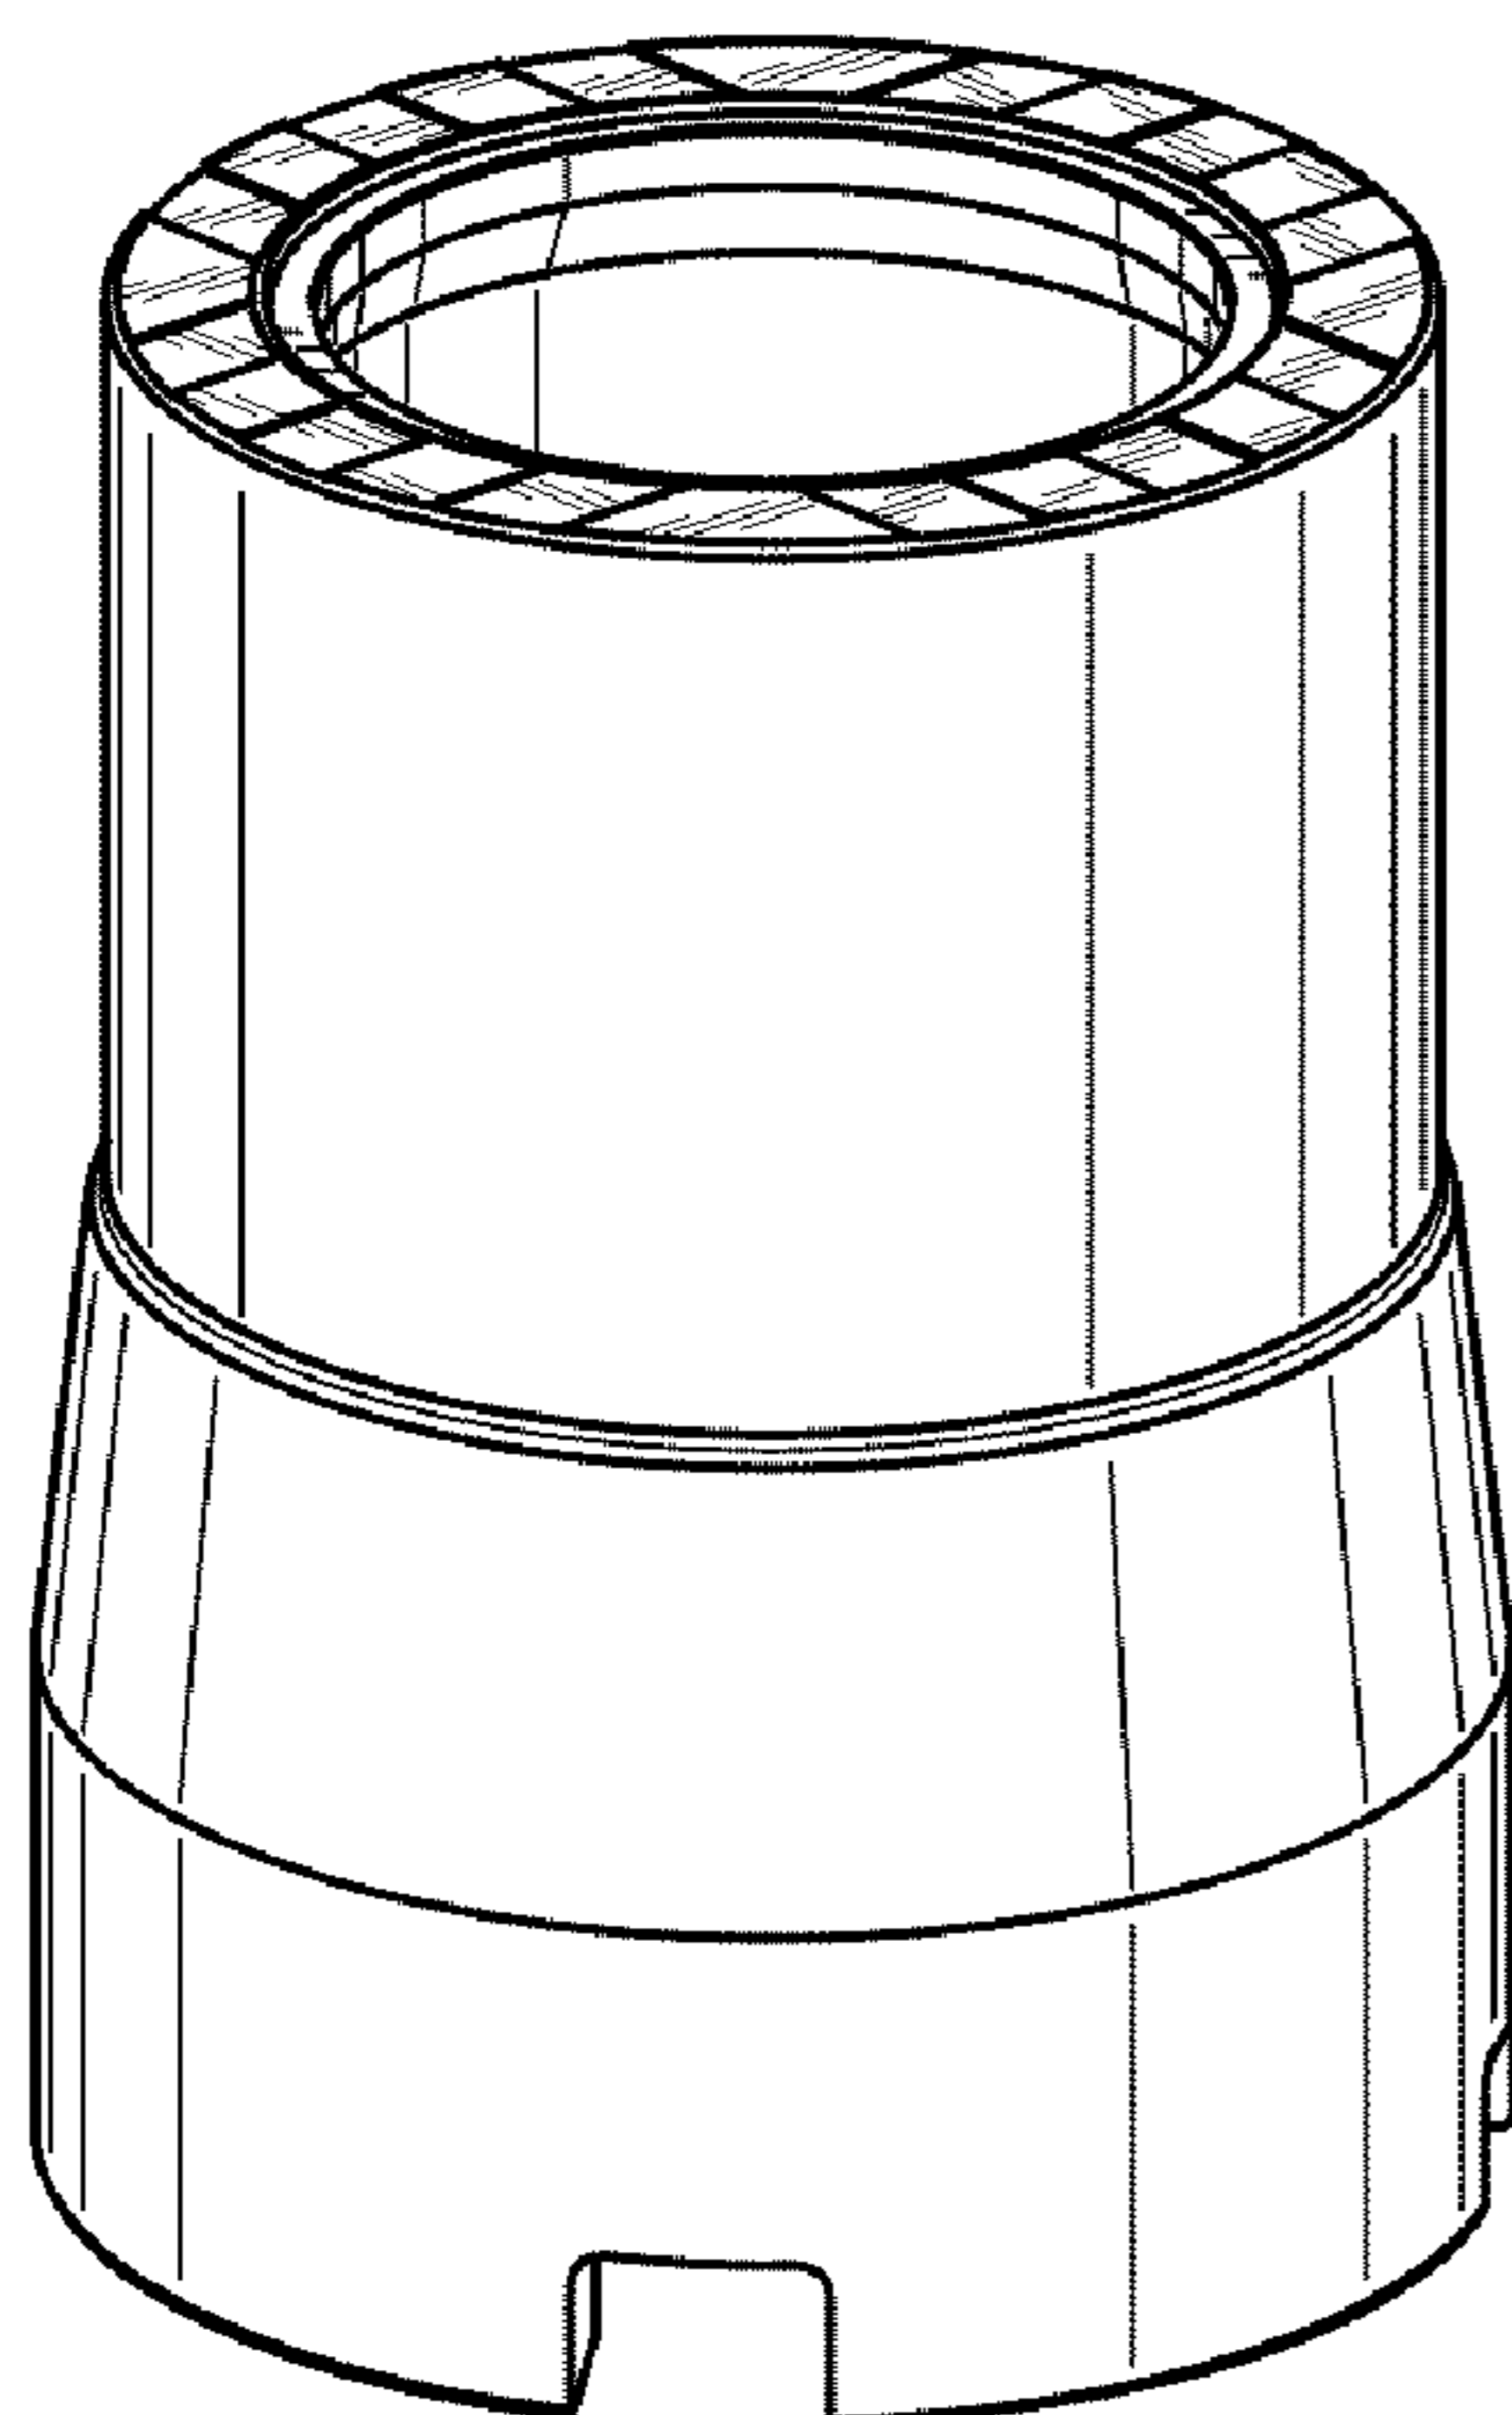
depicts a bottom perspective view of the core ring for use in a mold stack of FIG. 1;
